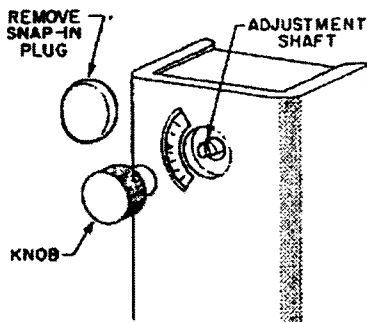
Drawing showing snap-in plug removed and the knob in line to assemble. Press the knob onto the slotted shaft.
